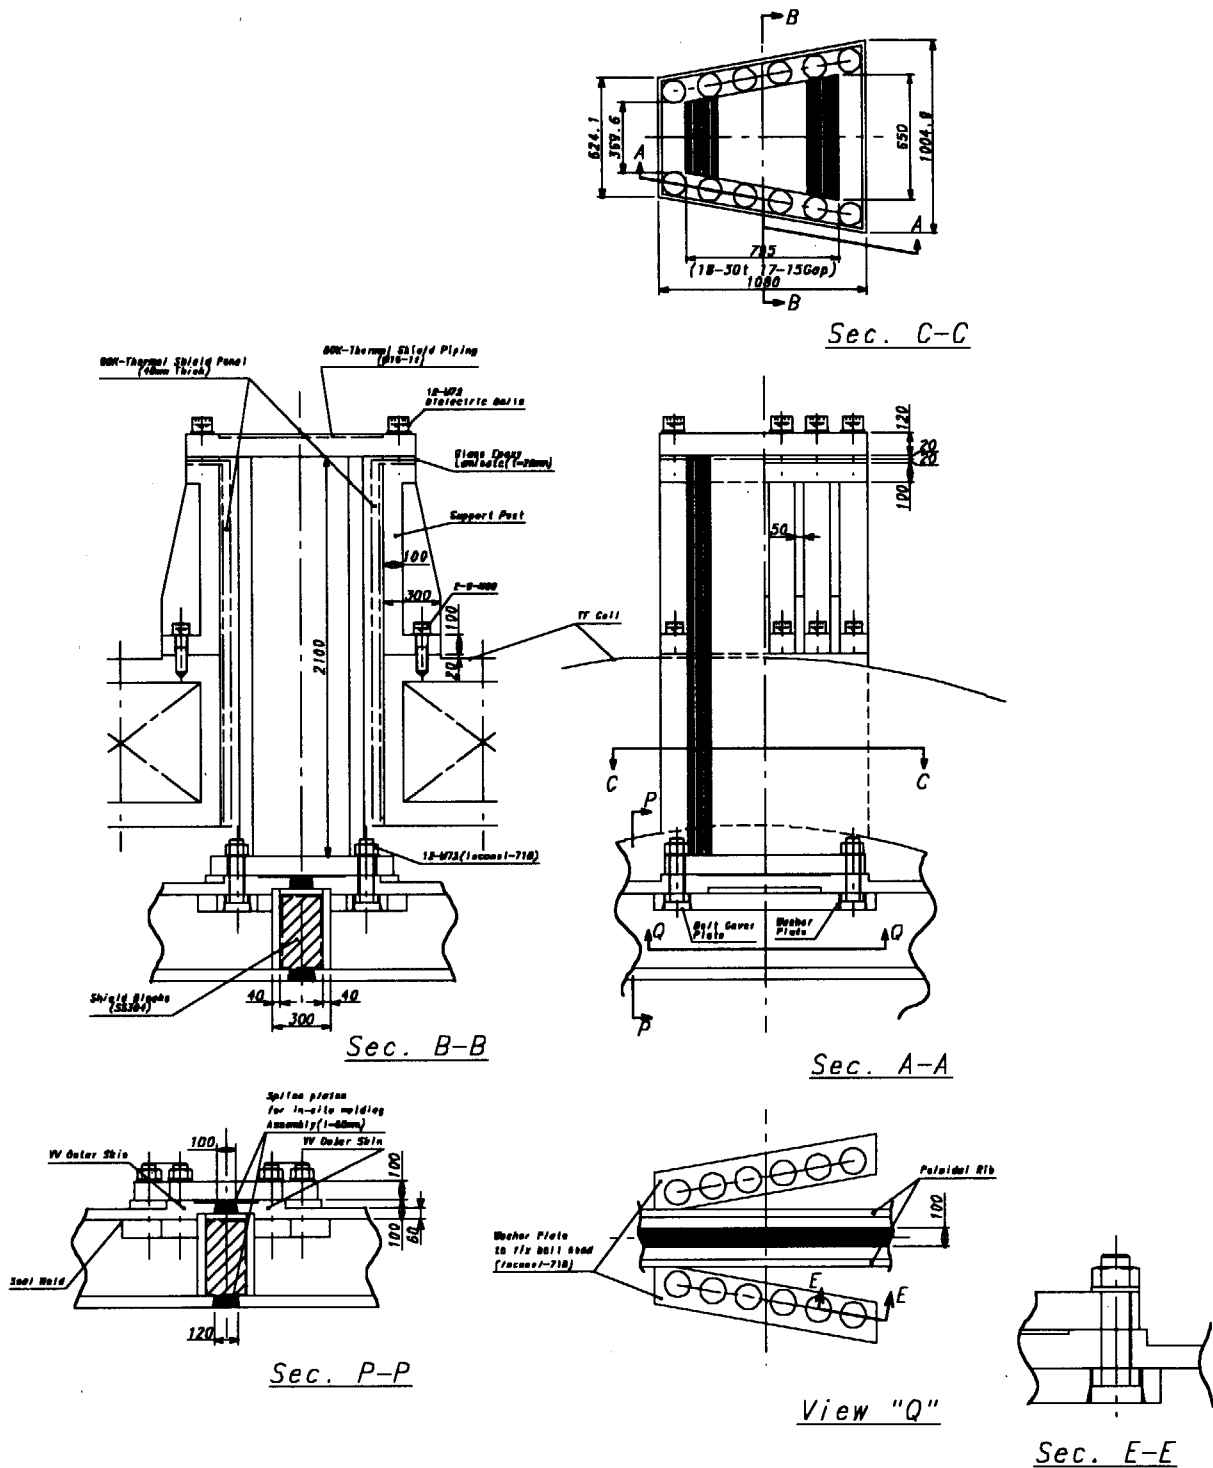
Detailed Cross-Sections of Top Hanging VV Support with Flexible Plates
